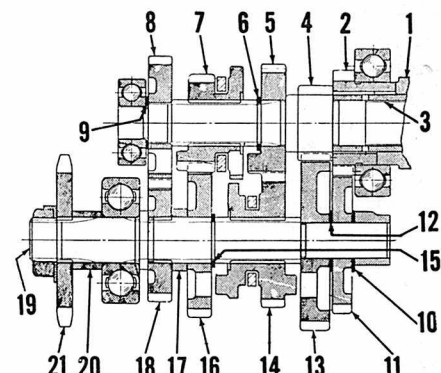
Cross sectional view of transmission assembly. Refer to Fig. BS2-21 for legend.
